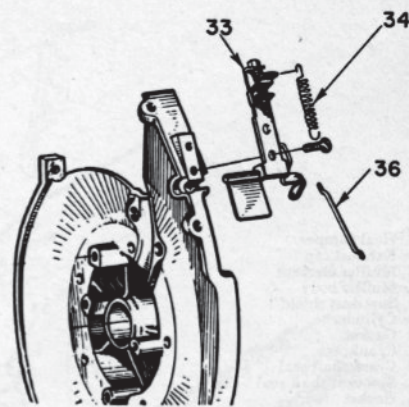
View showing governor assembly used on models 995D and 995G. Governor rod is connected to single hole in carburetor throttle shaft arm. Adjust governed speed by turning adjusting slide screw in governor and slide assembly (33). Governor spring (34) is connected between adjustable slide and arm on governor shaft.
